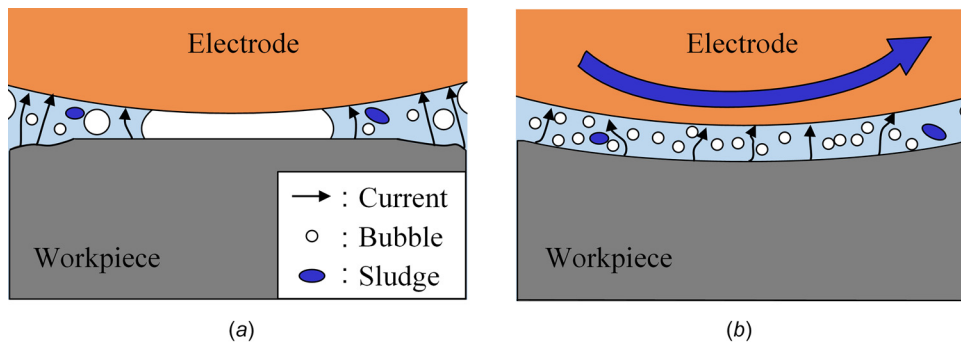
Schematic of tool rotation effect: (a) without tool rotation and (b) with tool rotation
